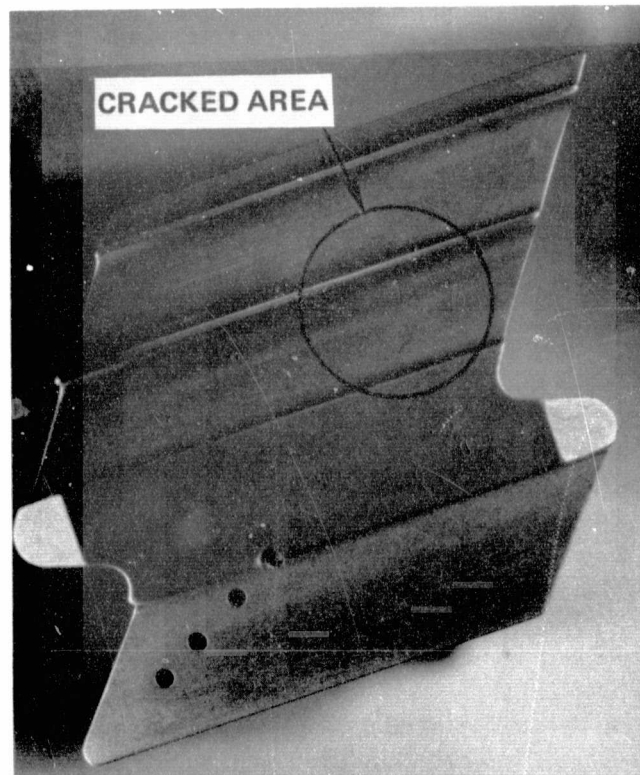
Photograph of Cracks Caused by Plug Welding of Cooling Holes
